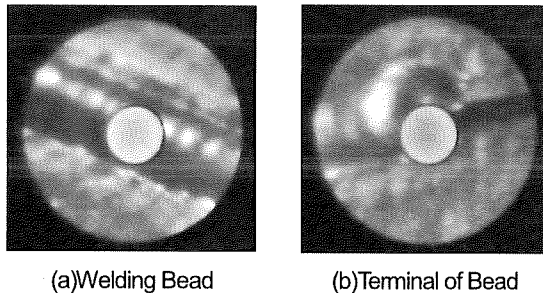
Images of Laser welding Bead by a Composite-type Optical Fiber Scope
